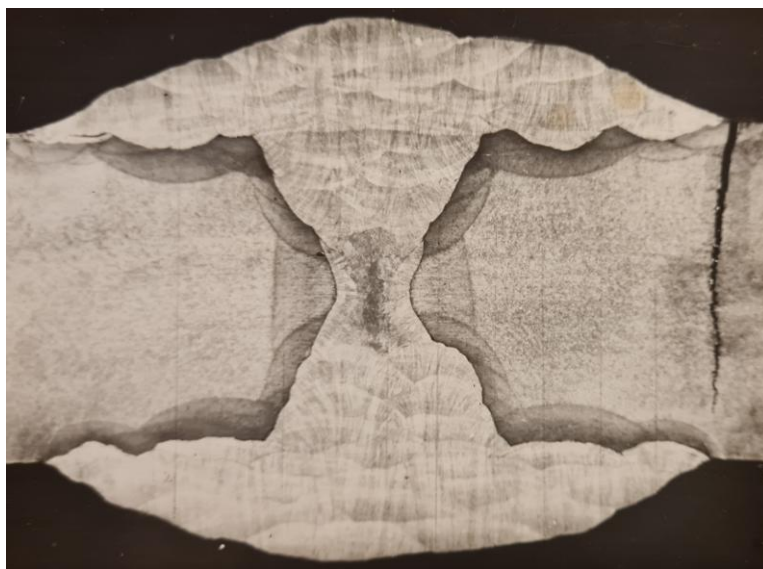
Fracture pattern of the butt-welded joint (photo of the authors)
